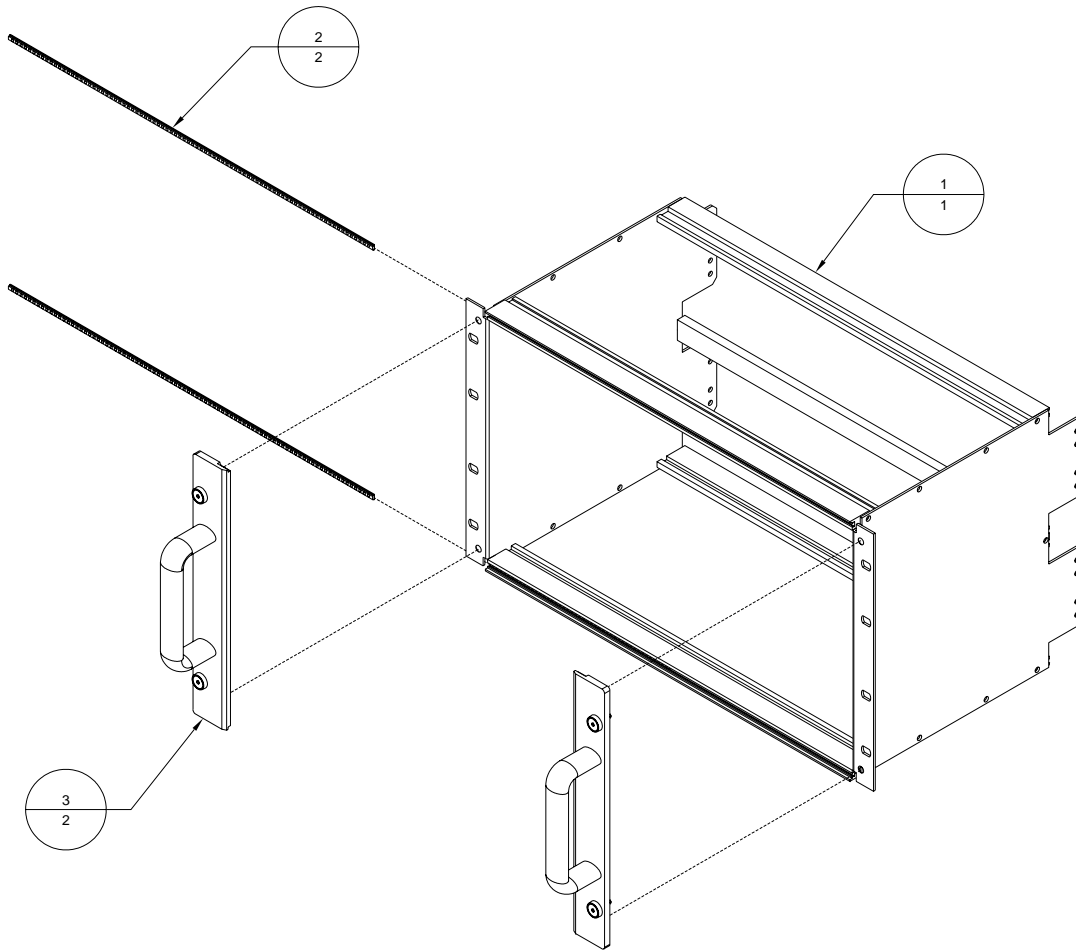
Rack, Frame, Unpopulated (BK-RACK-0)
